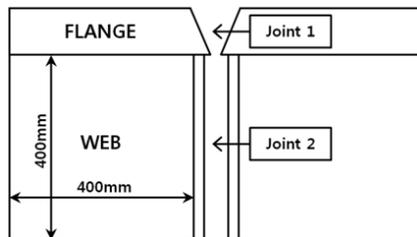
Schematic view of CBM fit-up for non-scallop T-bar joint welding
